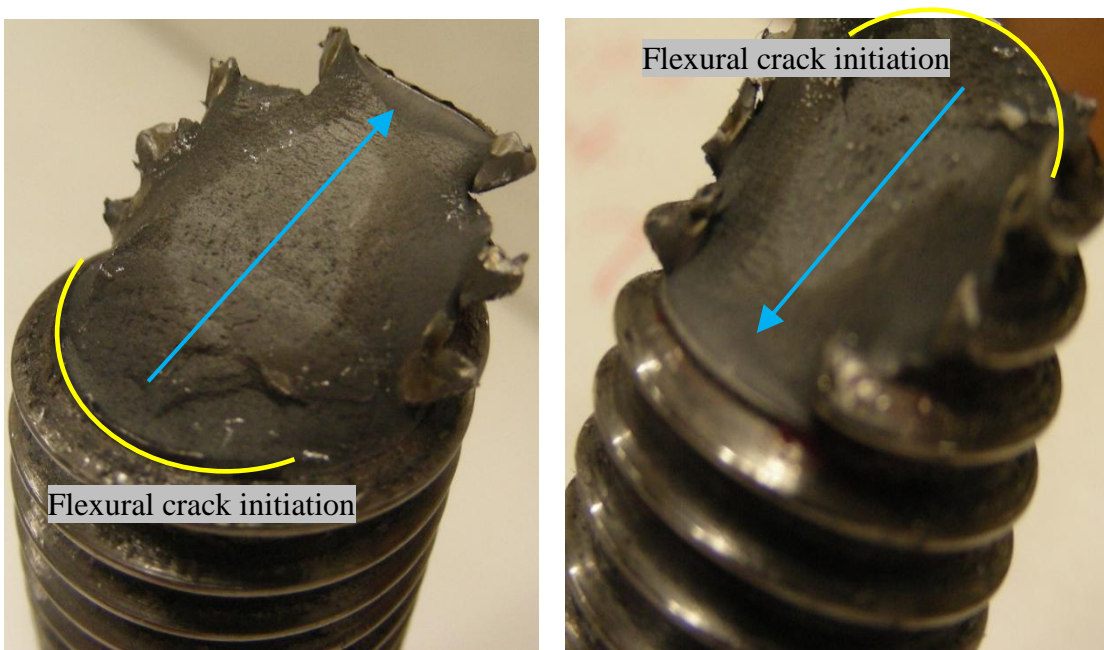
fracture surfaces of A193-4da-MD
